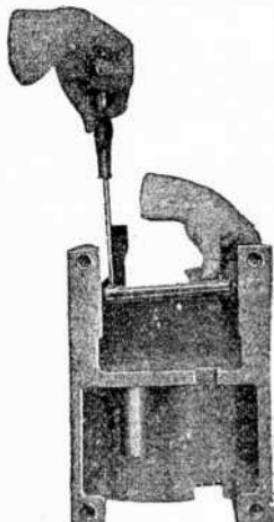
,143.—*How to assemble an air circuit breaker 9. Attaching the buffer to the solenoid magnet frame.
